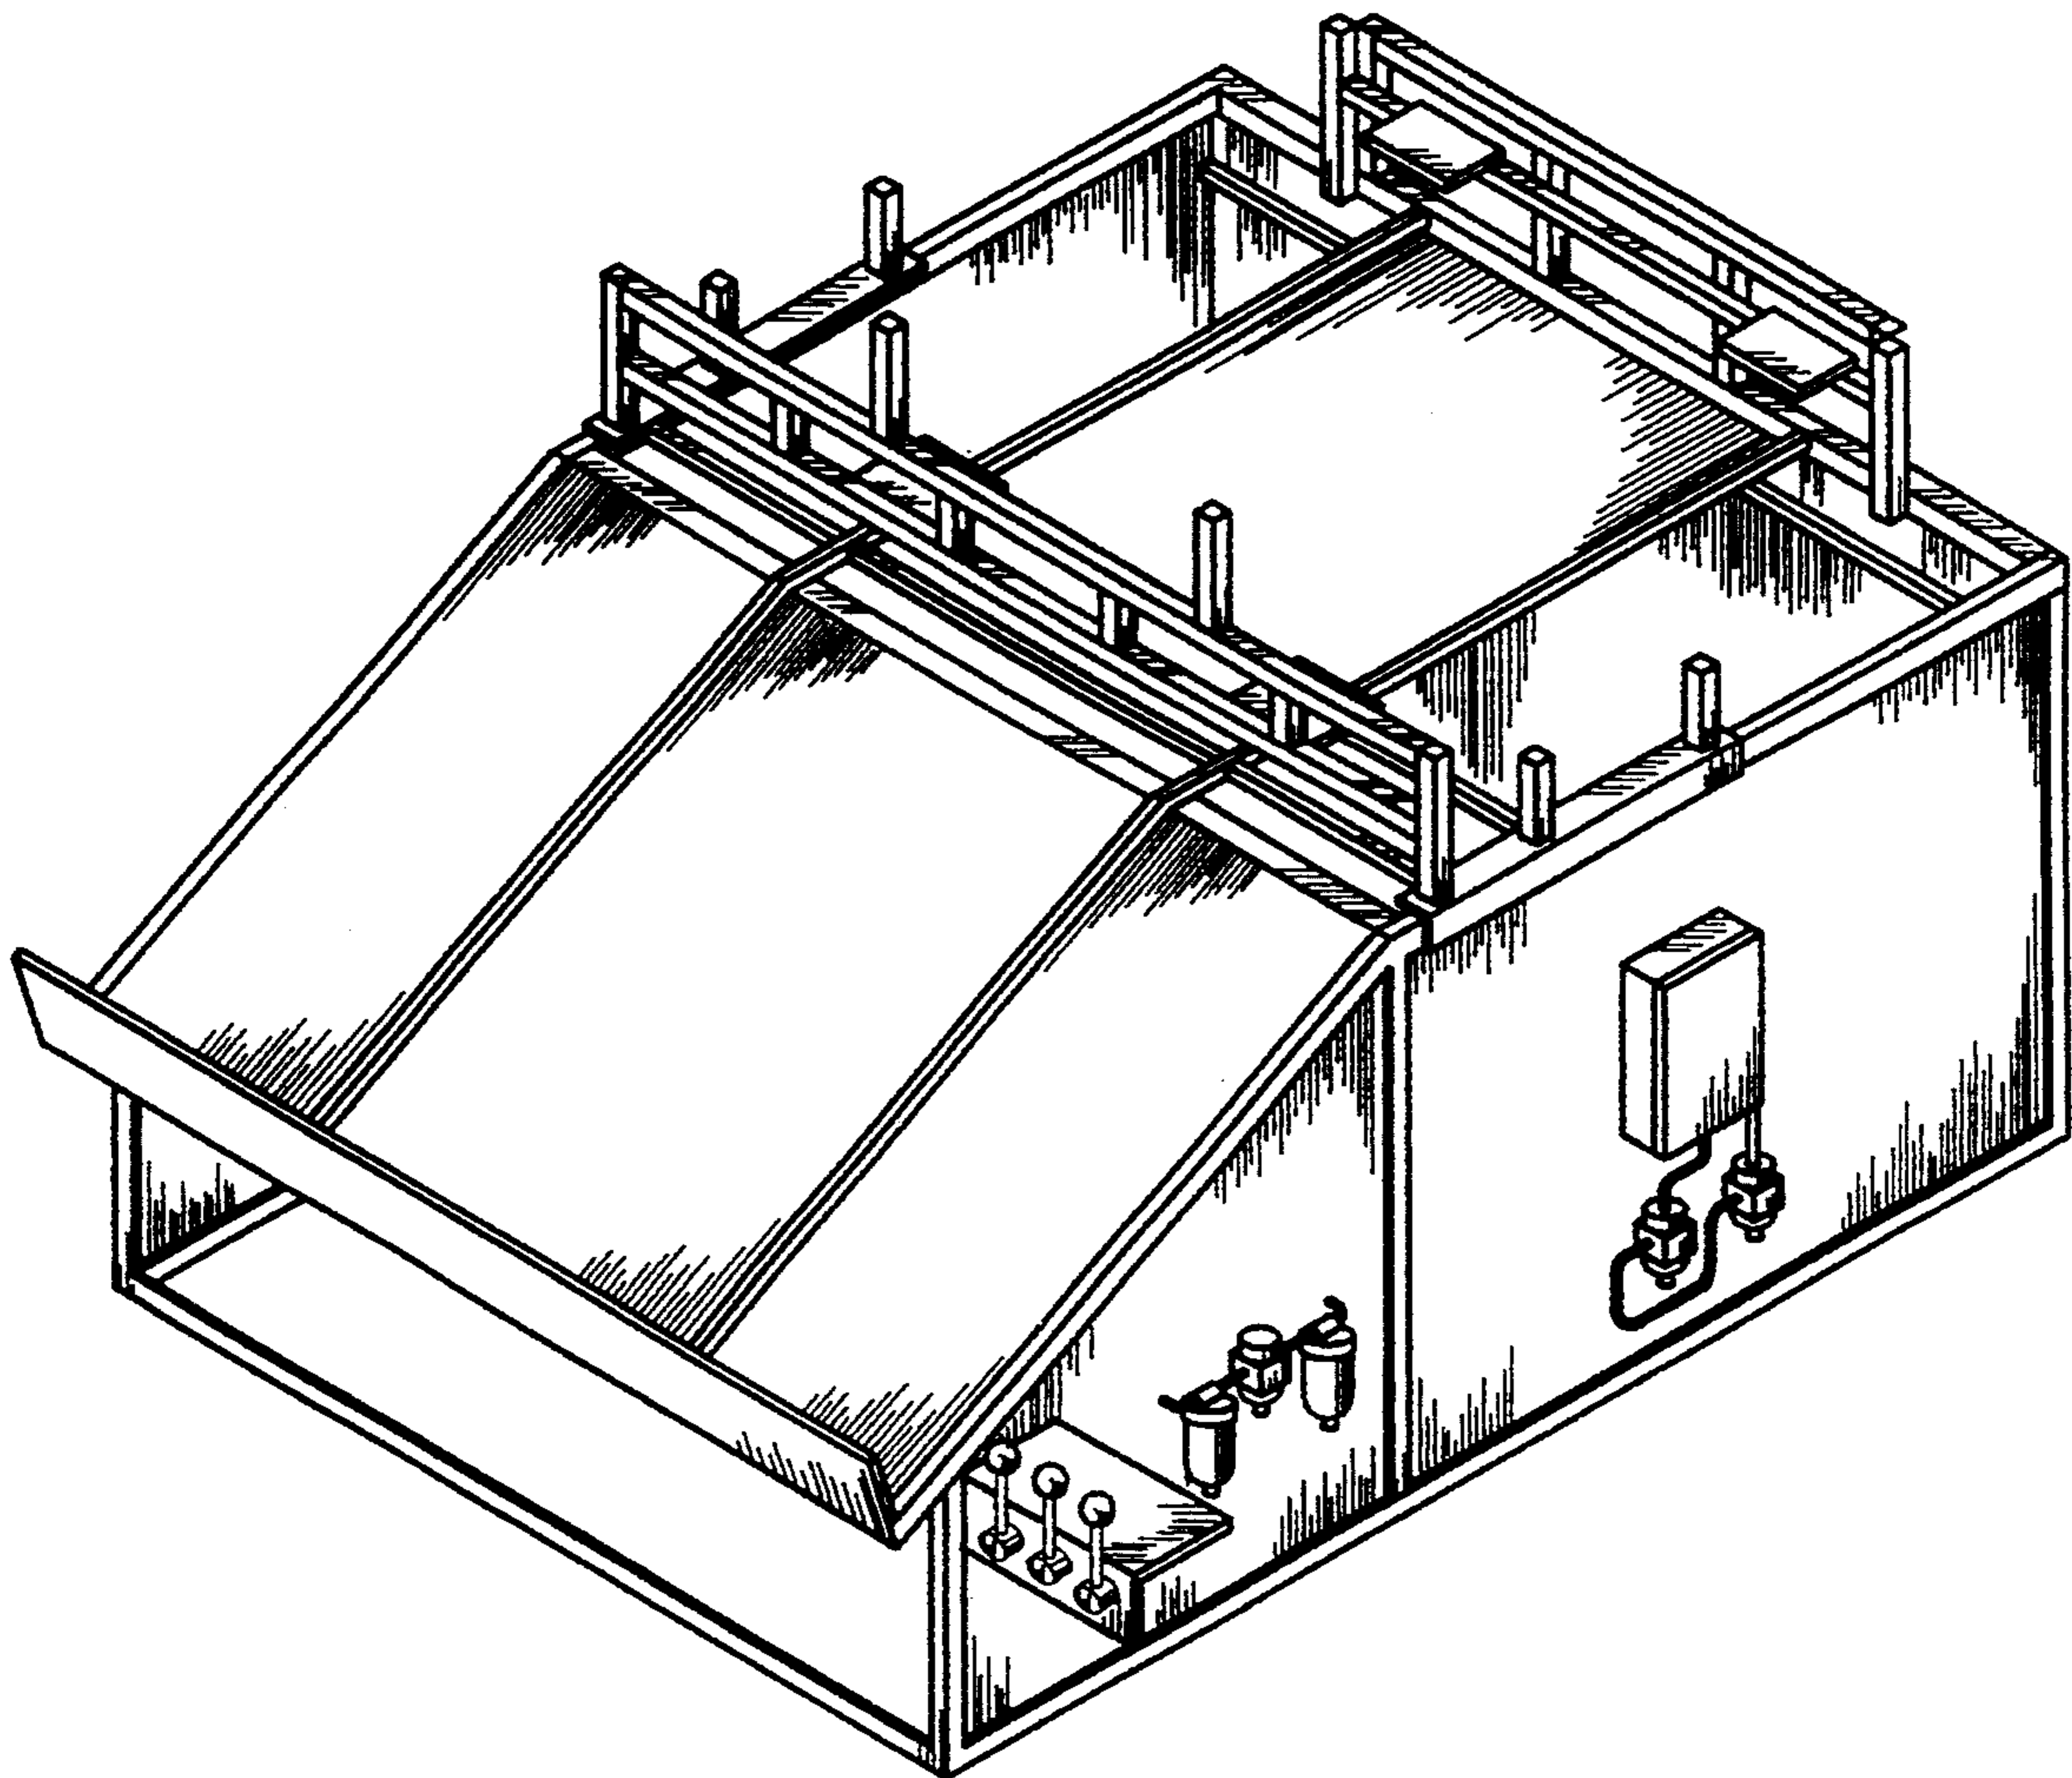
is an upper, right side perspective view of the pallet manufacturing machine according to the present invention;
